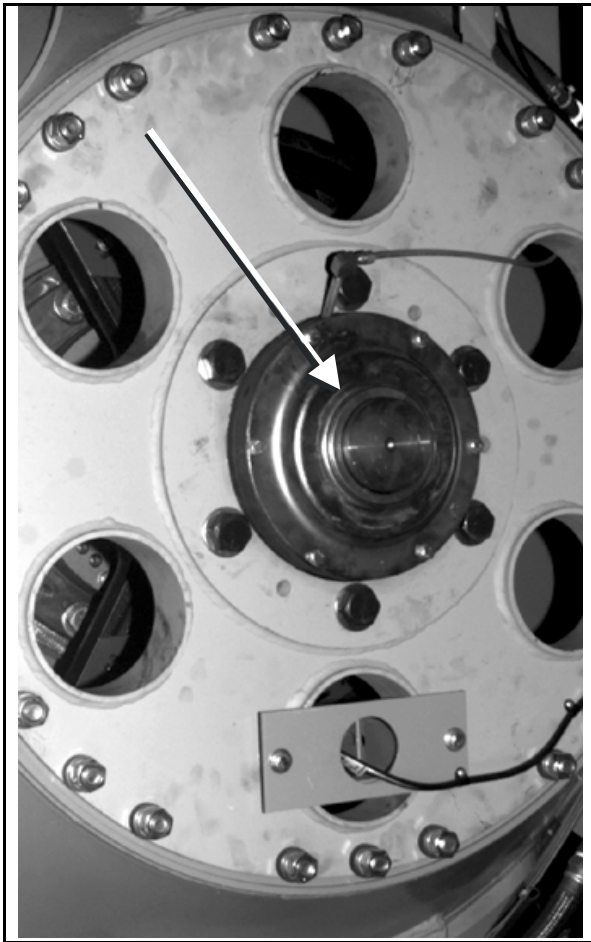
Shim Motor Platform to Plumb Motor Pulley
